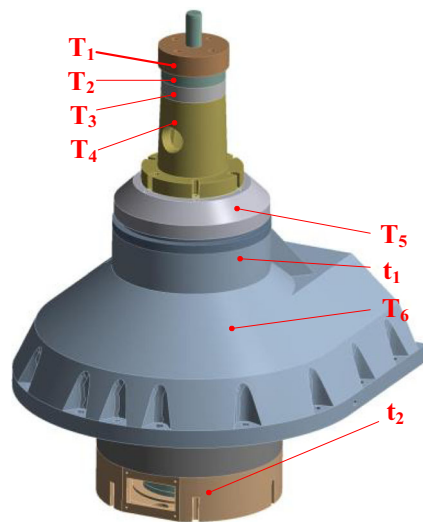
The geometric model of the worktable assembly of the dry gear hobbing machine
